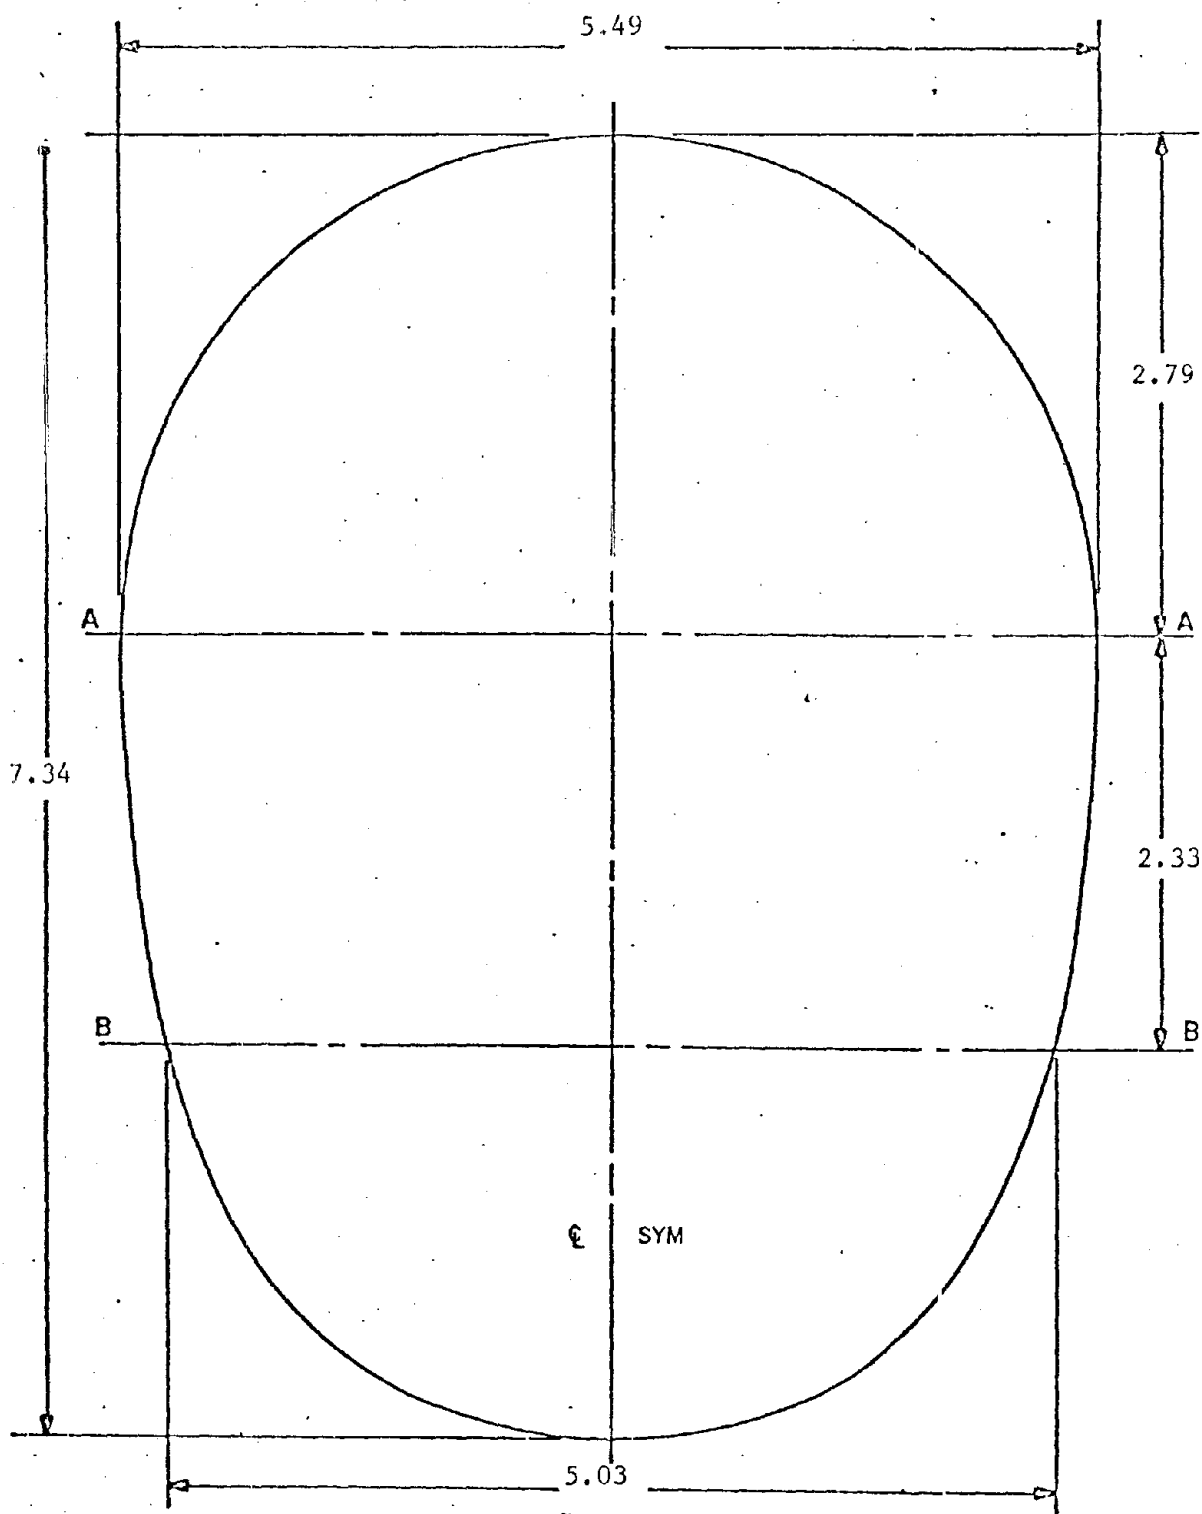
(b) HEADFORM I (DIMENSIONS IN INCHES, $\pm .030''$)
